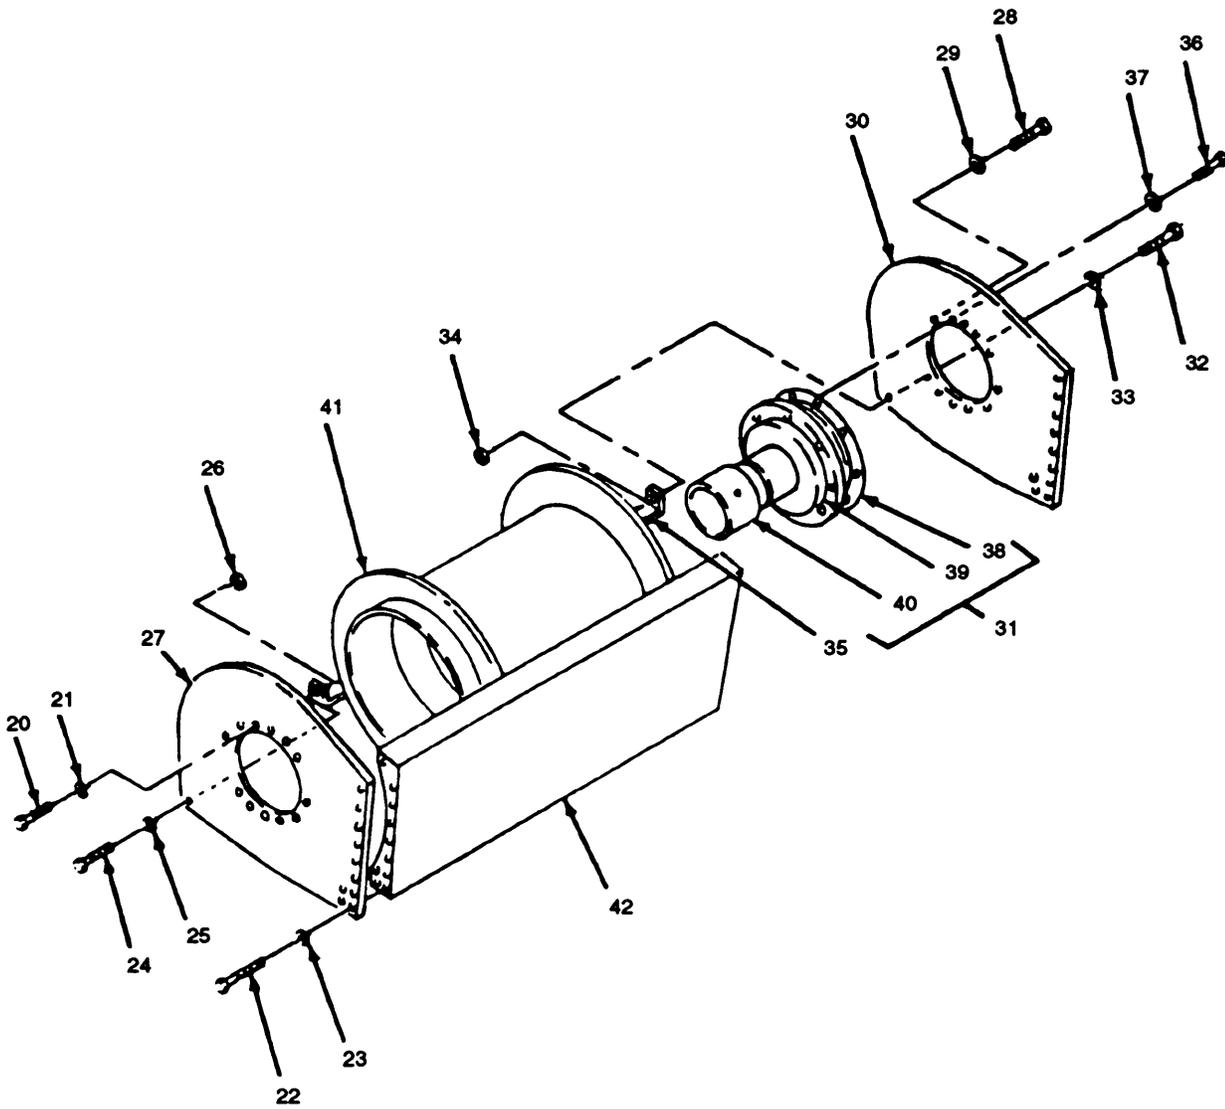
Winch Assembly Model PG-115-043R, Disassembly (Sheet 2 of 5).
